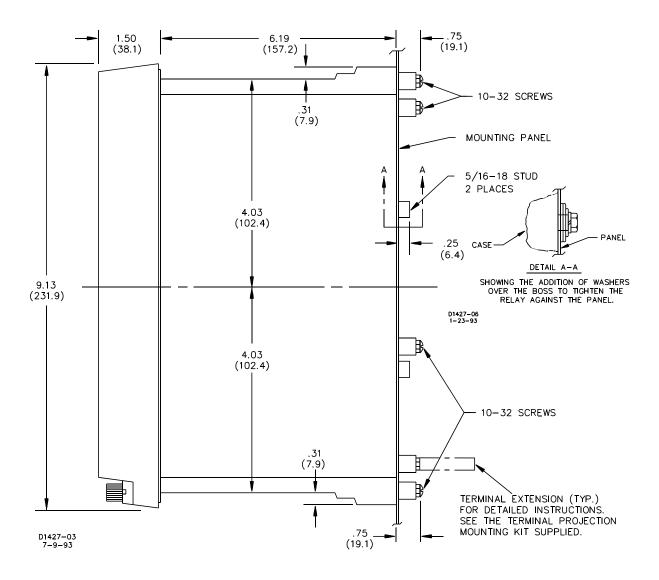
S1 Case, Double-Ended, Projection Mounting, Side View
